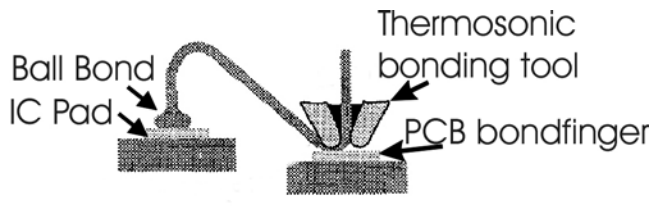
Drawing¹¹ showing one complete thermosonic bond. The wire is threaded through the capillary within the bonding tool and the tool tip from the capillary to the outer edge is applied to make the tail (or crescent) bond (see figure 5).
